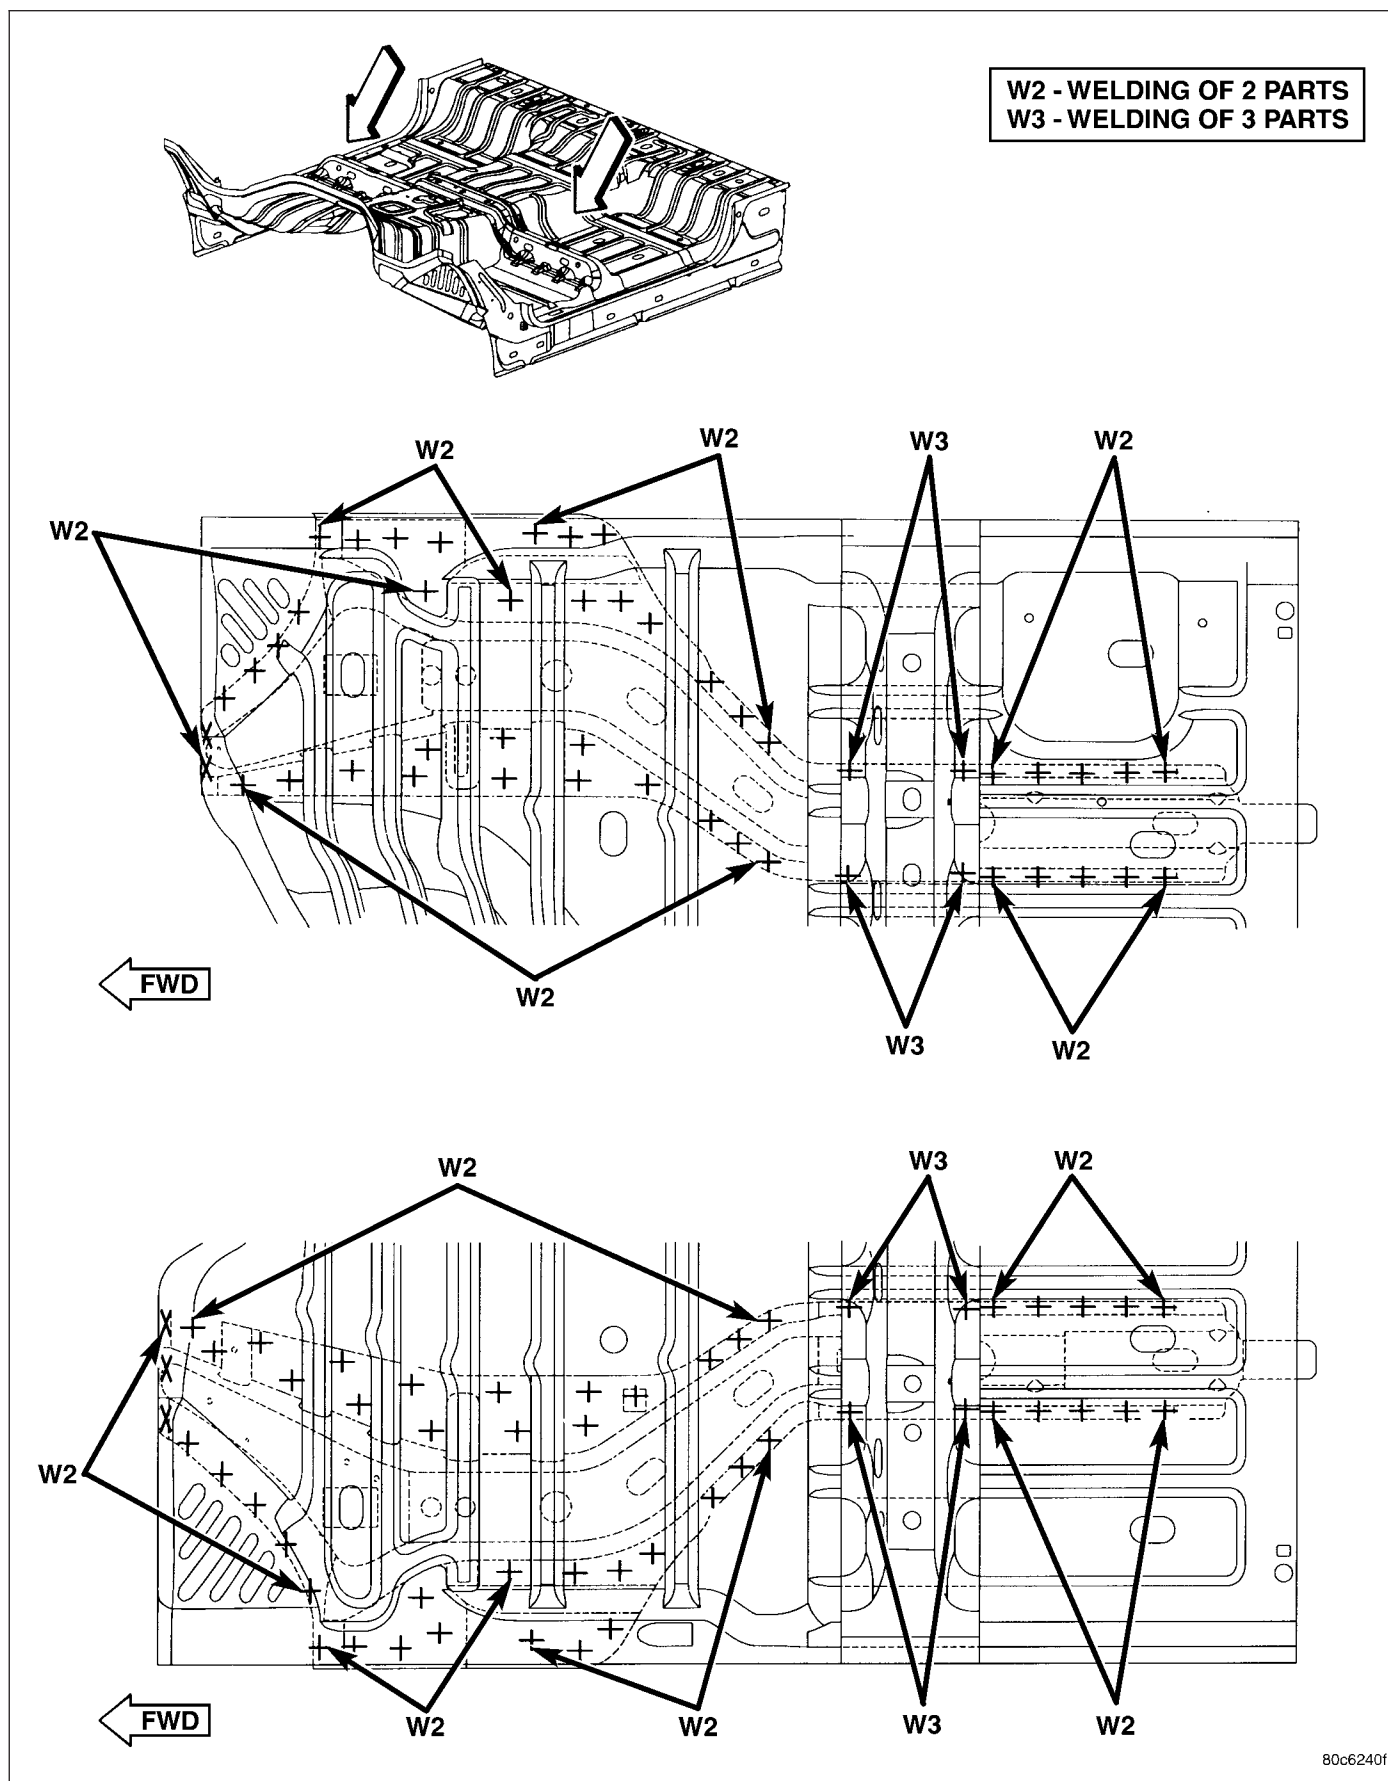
SEAT MOUNTING FRONT CROSSMEMBER - STANDARD CAB
